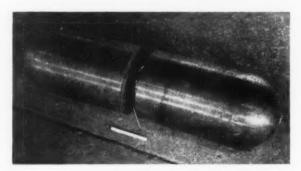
FIG. I—The pressure cylinder is tack welded, using local preheat, prior to placing it in a special preheating oven. Note the depth of the U joint.
